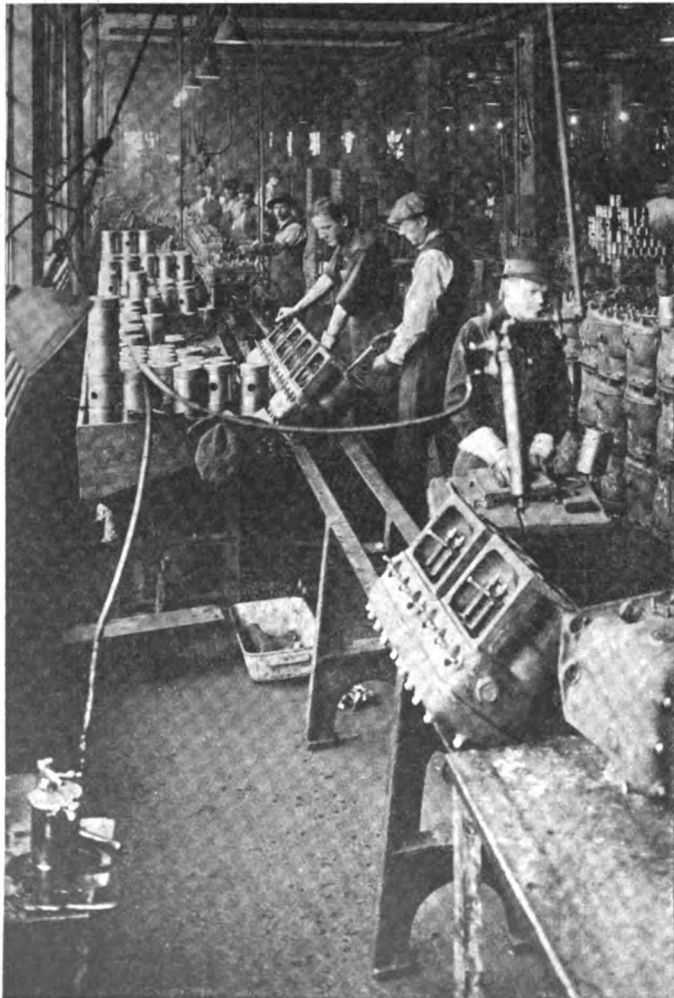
Assembly department, showing racks tilted to the proper angle for fitting pistons to cylinders.
